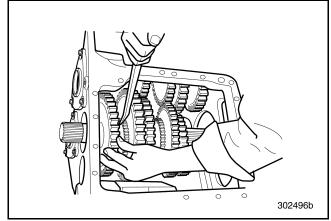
Sliding Lo/Reverse Sliding Clutch and Reverse Speed Gear to Engage Gear Teeth (T313L21/T318L21 Shown)
